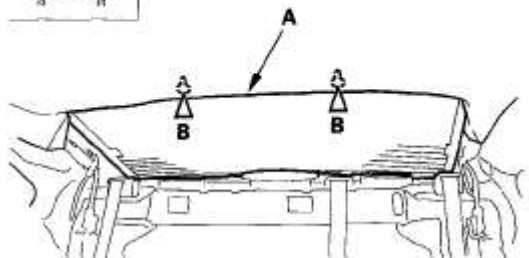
Detaching Clips To Remove Rear Portion Of Headliner
